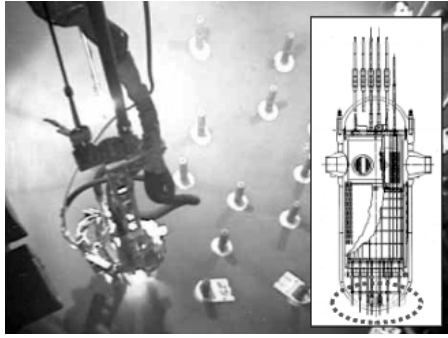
Application of laser peening to J-groove weld of bottom mounted nozzle
